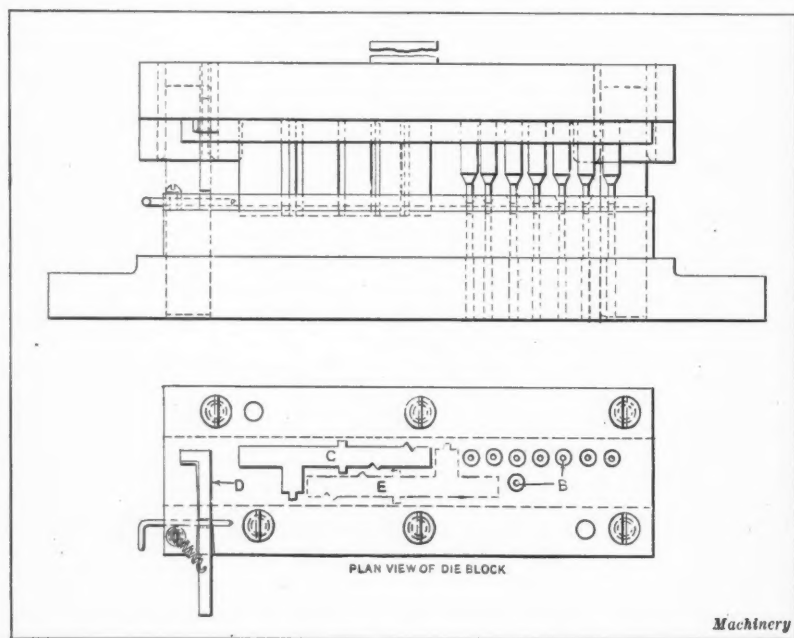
Punch and Die used for piercing and blanking Part shown at the Top in Fig. 1
